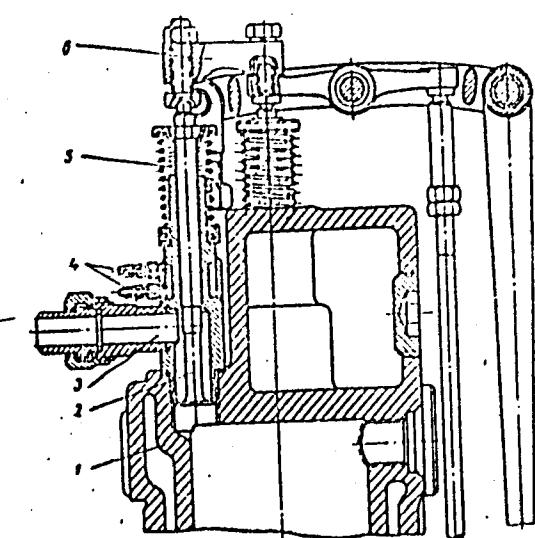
Scheme of the soot-collecting valve setup in the cylinder head of the engine MT 9-2 (IT 9-2): 1 - cylinder head; 2 - soot-collecting valve; 3 - outlet of exhaust gases; 4 - coolant supply to the valve sleeve; 5 - valve spring; 6 - valve drive.
